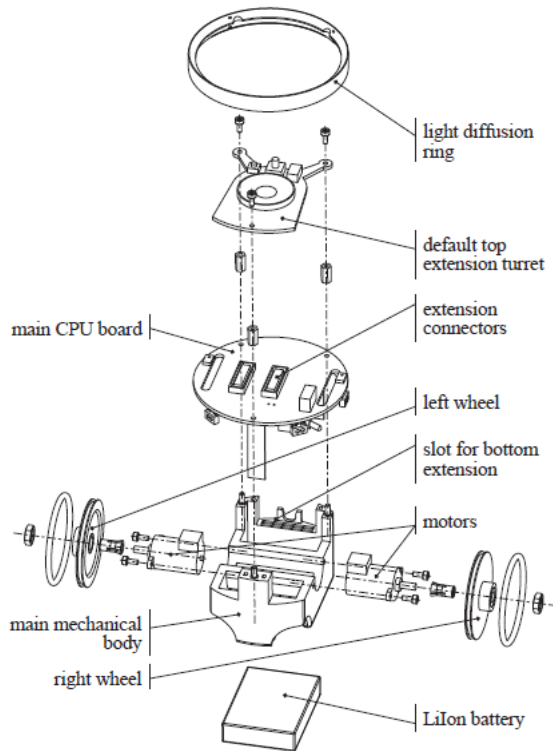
The Mechanical Structure of an e-puck in an exploded view
